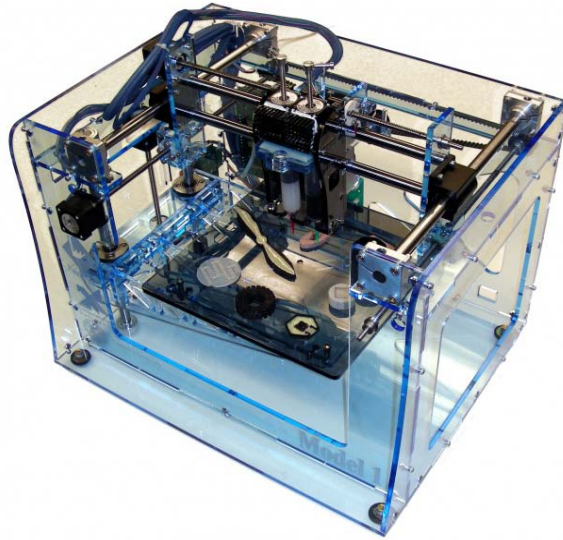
FAB@HOME PRINTING PLATFORM [35]
